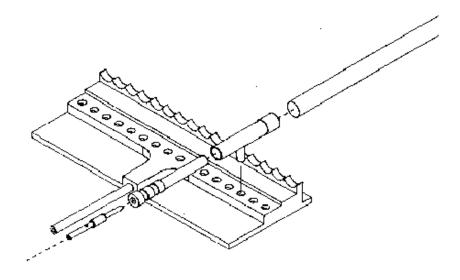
Exploded view of a straw tube connection to the gas manifold plate and HV connector.
